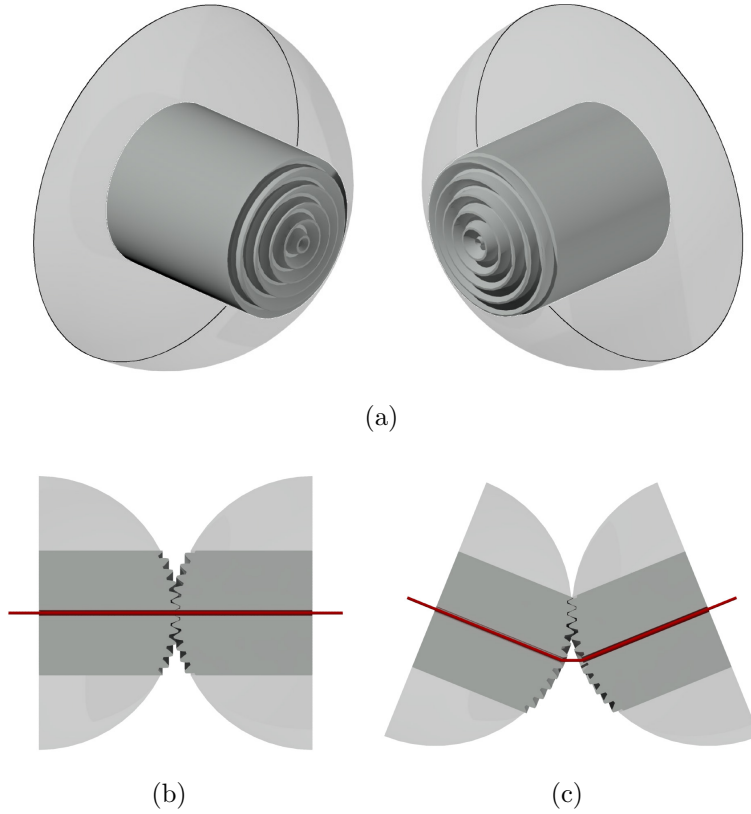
Physical model of the contact joint, with axial-symmetric toothed contact profiles, achieving the kinematic constraint schematized in Figure 6. (a) View of the disassembled joint with the axial-symmetric toothed contact surfaces; longitudinal section of the joint (cable represented by the red solid line) in (b) the reference state and (c) the rotated configuration.
